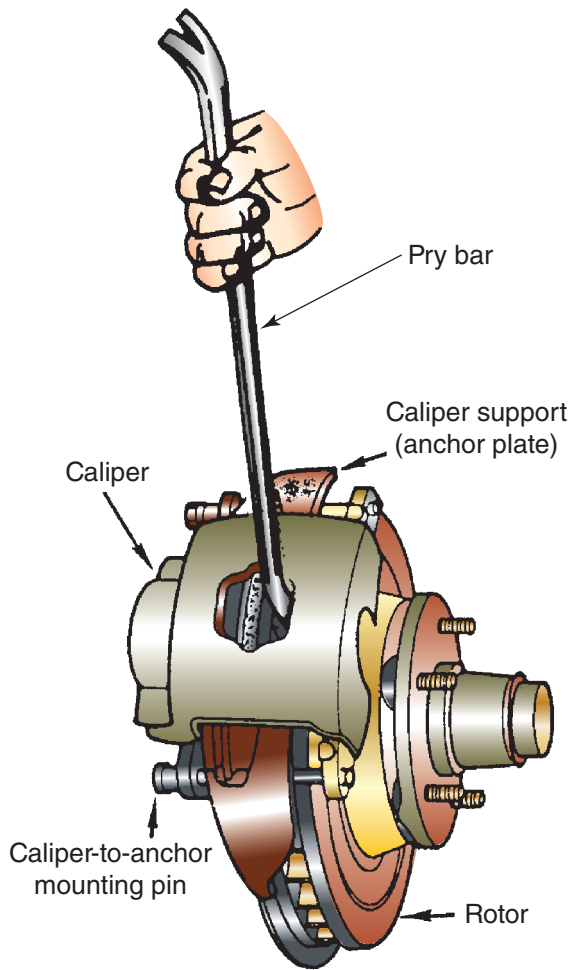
A large screwdriver or pry bar can be used to move a piston back into its bore in the caliper.
